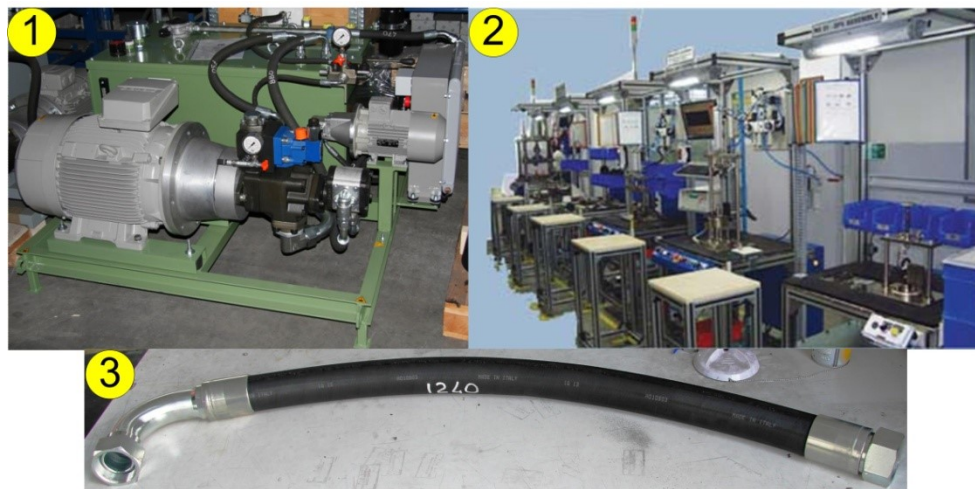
Product assortment of Metalmeccanica SPA: 1) hydraulic power units, 2) assembly lines and 3) high-pressure flexible hoses for industry
